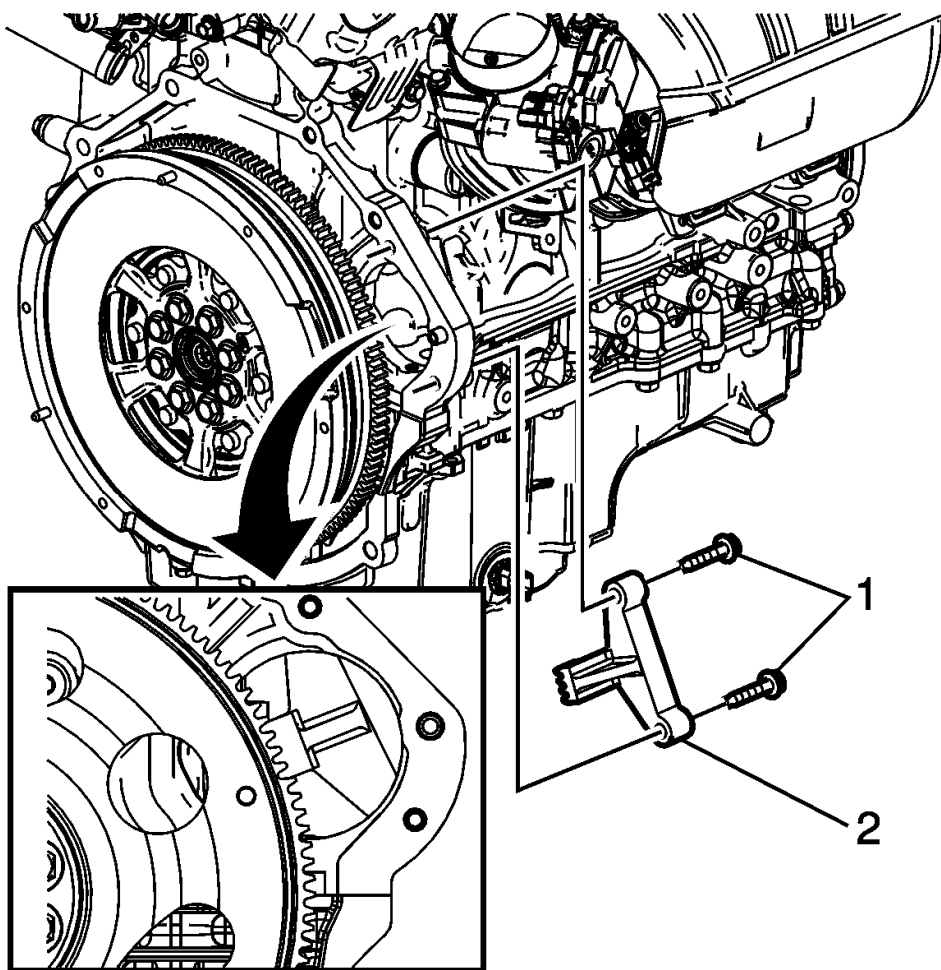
Flywheel Holding Tool & Starter Motor Bolts
